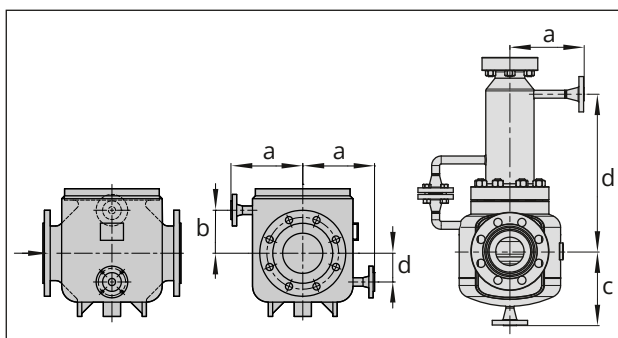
Type 3251 with heating jacket · Dimensions on request
